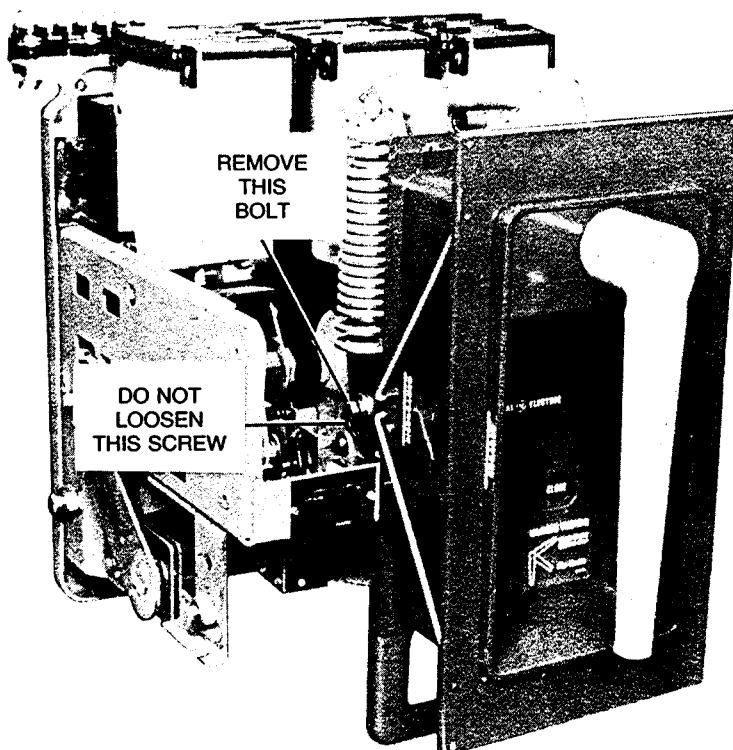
SLOW CLOSING—LOWER SPRING ASM HARDWARE
